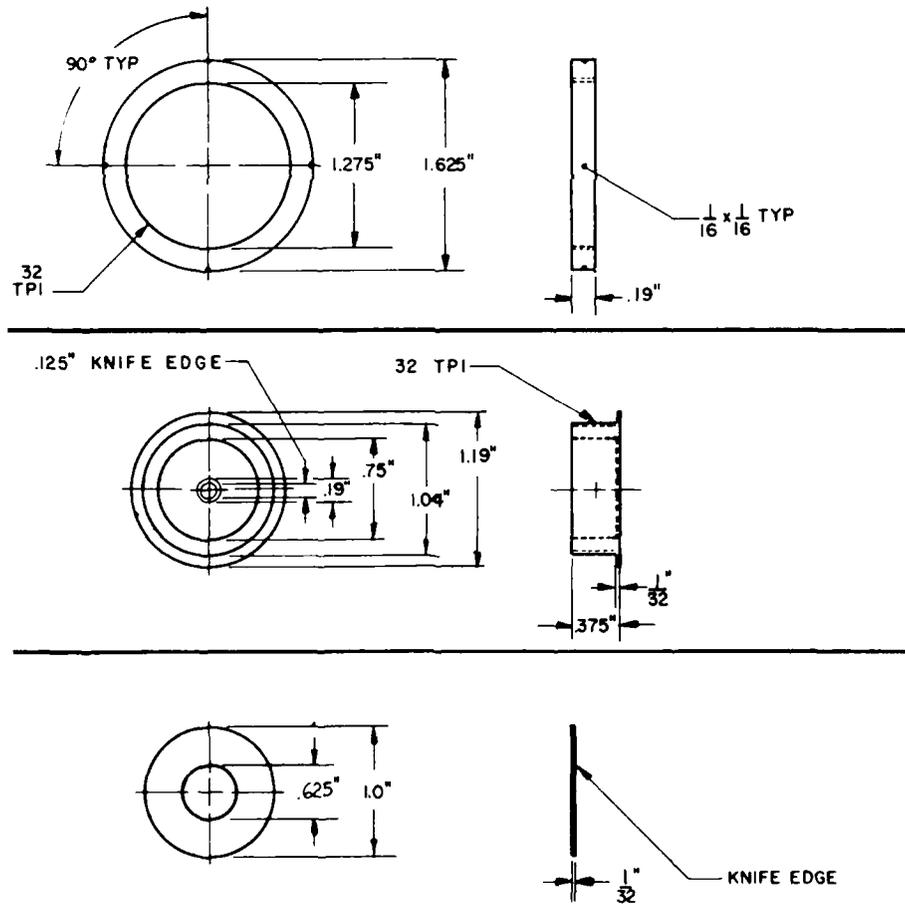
FSM detector; unless otherwise specified, tolerances are  $\pm .002$ : (a) front housing outer locking and (b) threaded baffle and (c) front lens baffle
